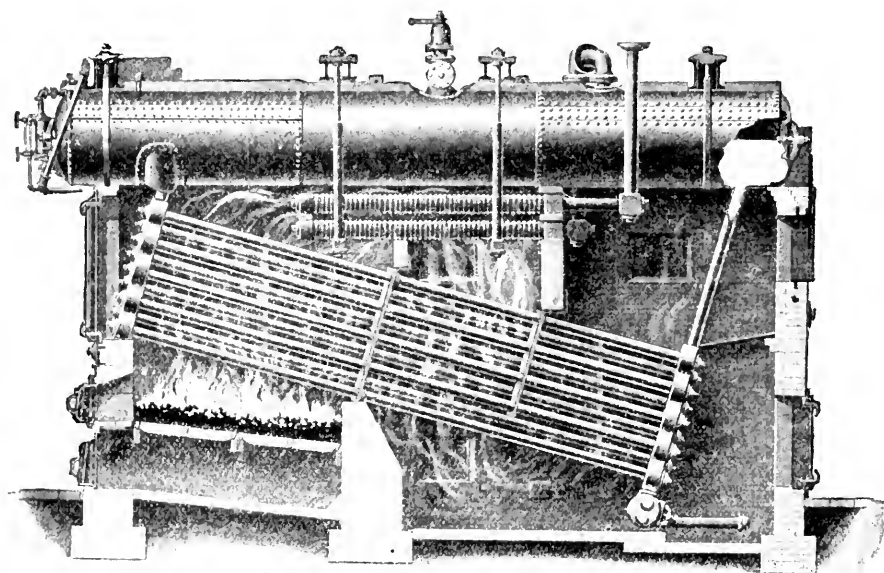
FOSTER SUPERHEATER COMBINED WITH B. & W. BOILER.
